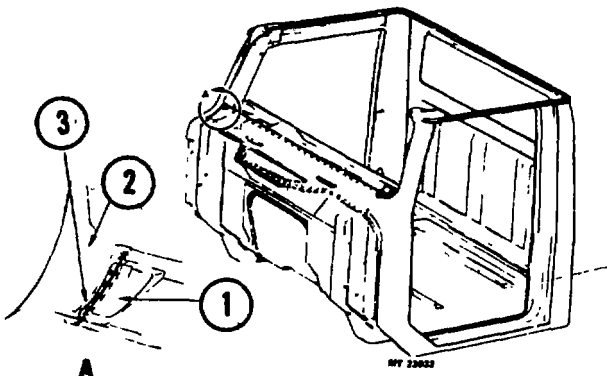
Windshield Outer Panel to Cowl Inner Panel Spot Weld (Rt. Side Shown)
